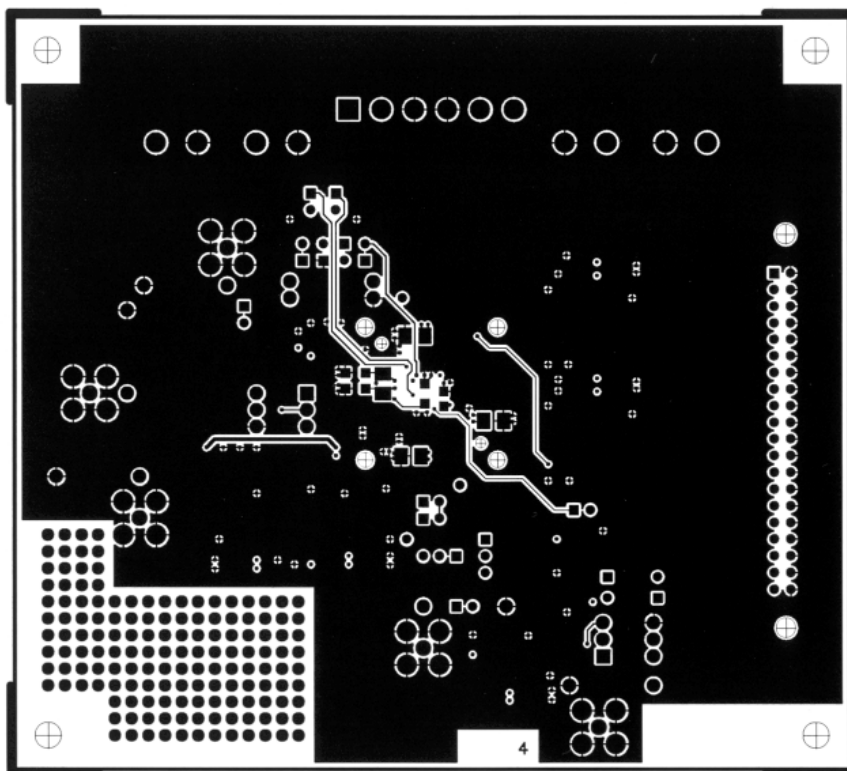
Evaluation Board Solder Side Layout (Not to Scale)
